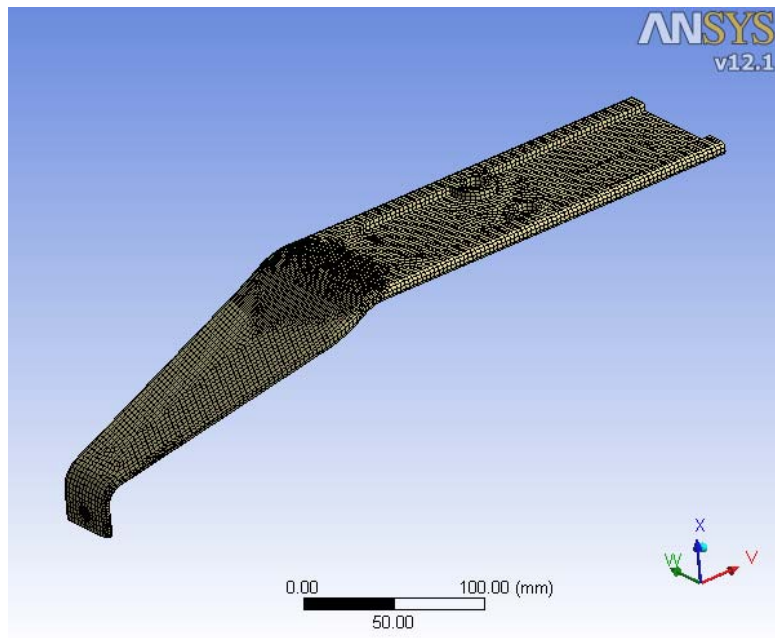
Meshed Model of Rear Gear (half gear) for Testing in ANSYS⁸
